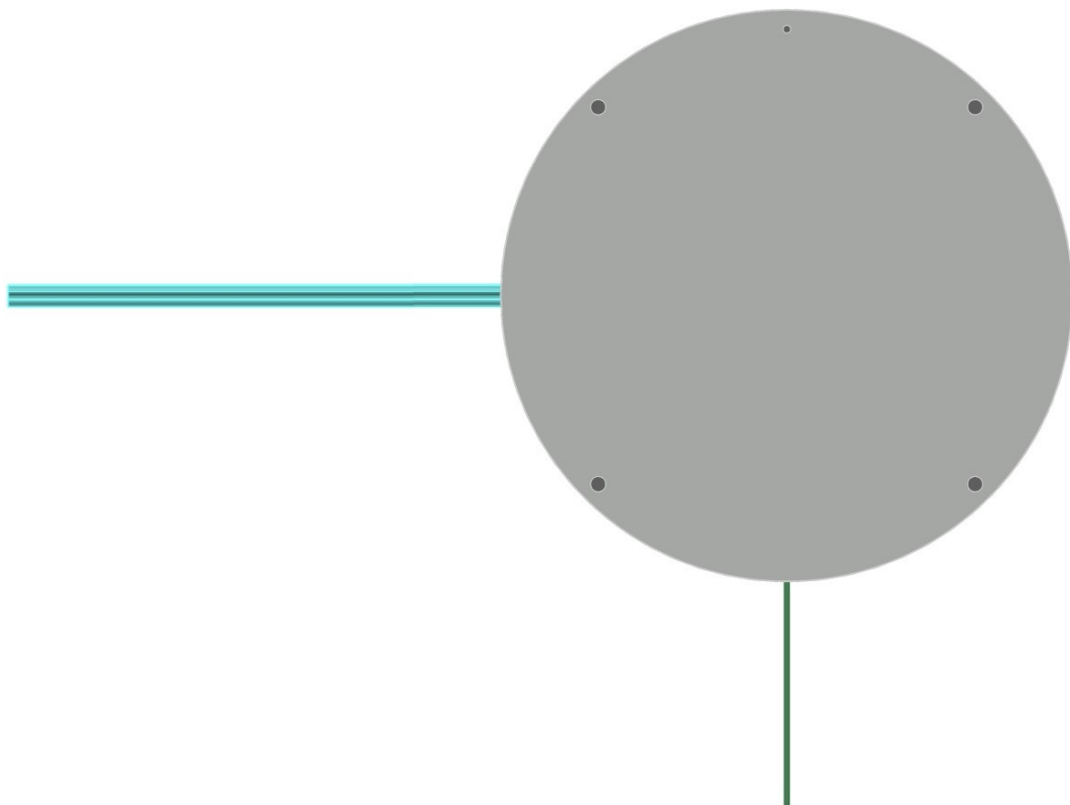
2D view of the PEA cell assembly – bottom view
